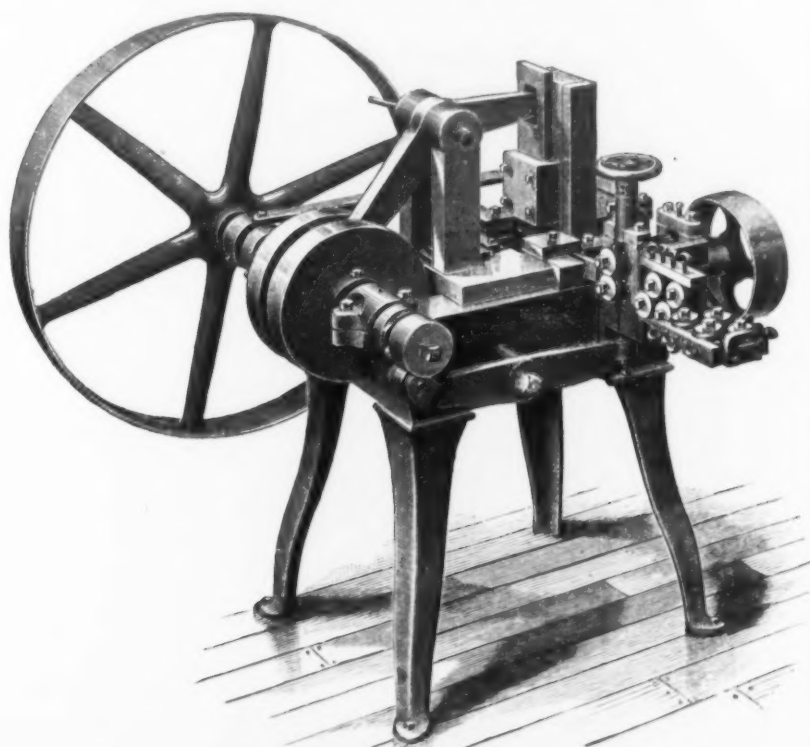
Wire-Forming Machine with Double Cam Motion.
